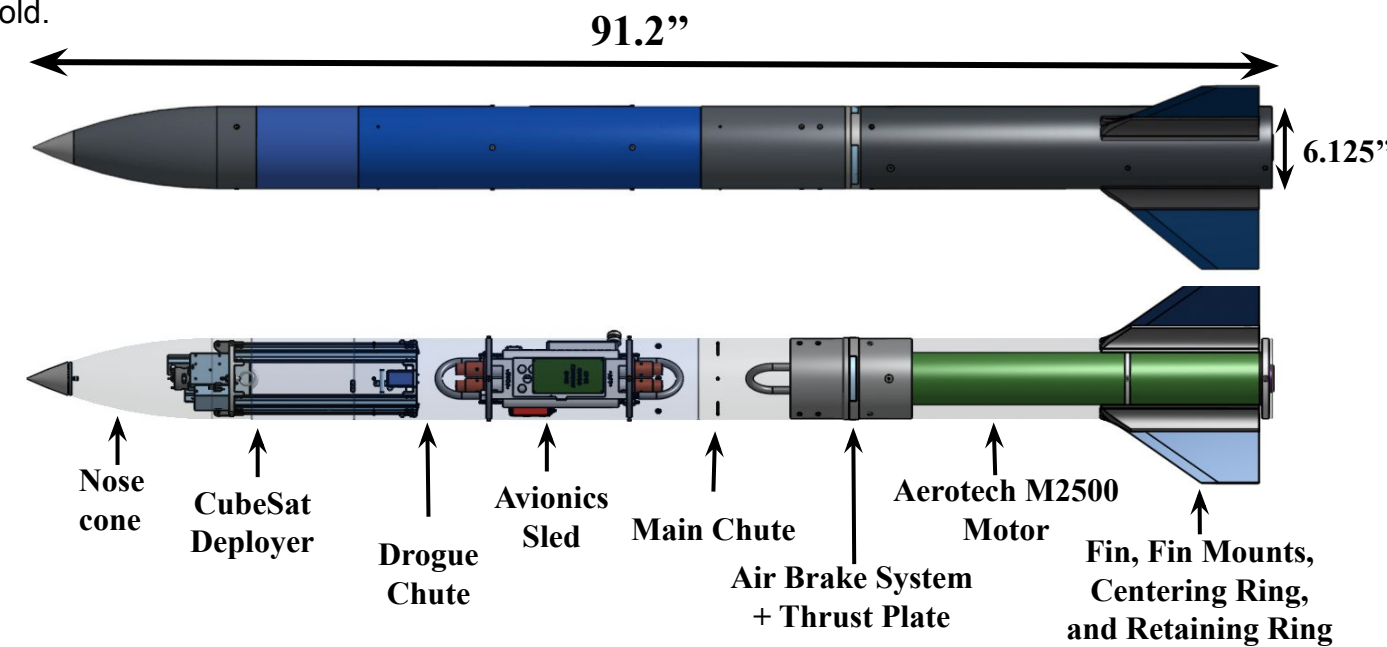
External and internal view of Blue Reaper with labels and principle dimensions
